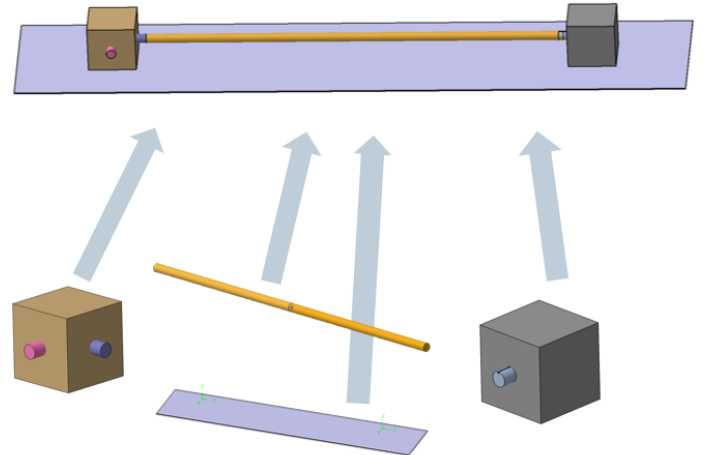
An example of synthesizing multi-body simulation models. The length of the shaft depends on the position of the actuator and gearbox.
